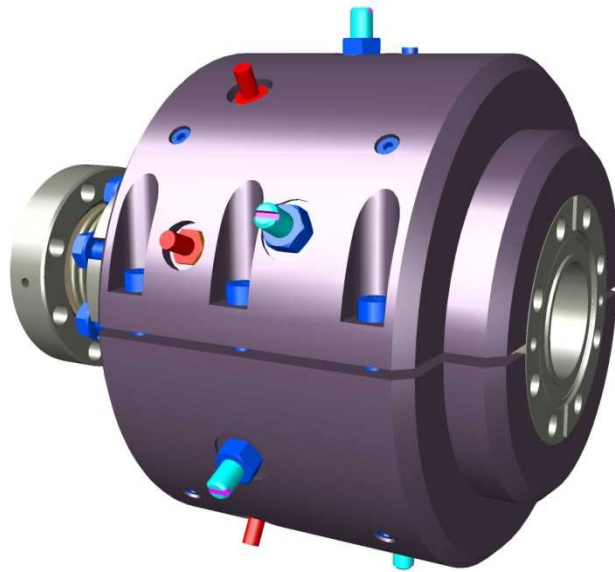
Toroid transformer completely with housing. One can see that the housing is supported by the flanges of the vacuum chamber.
